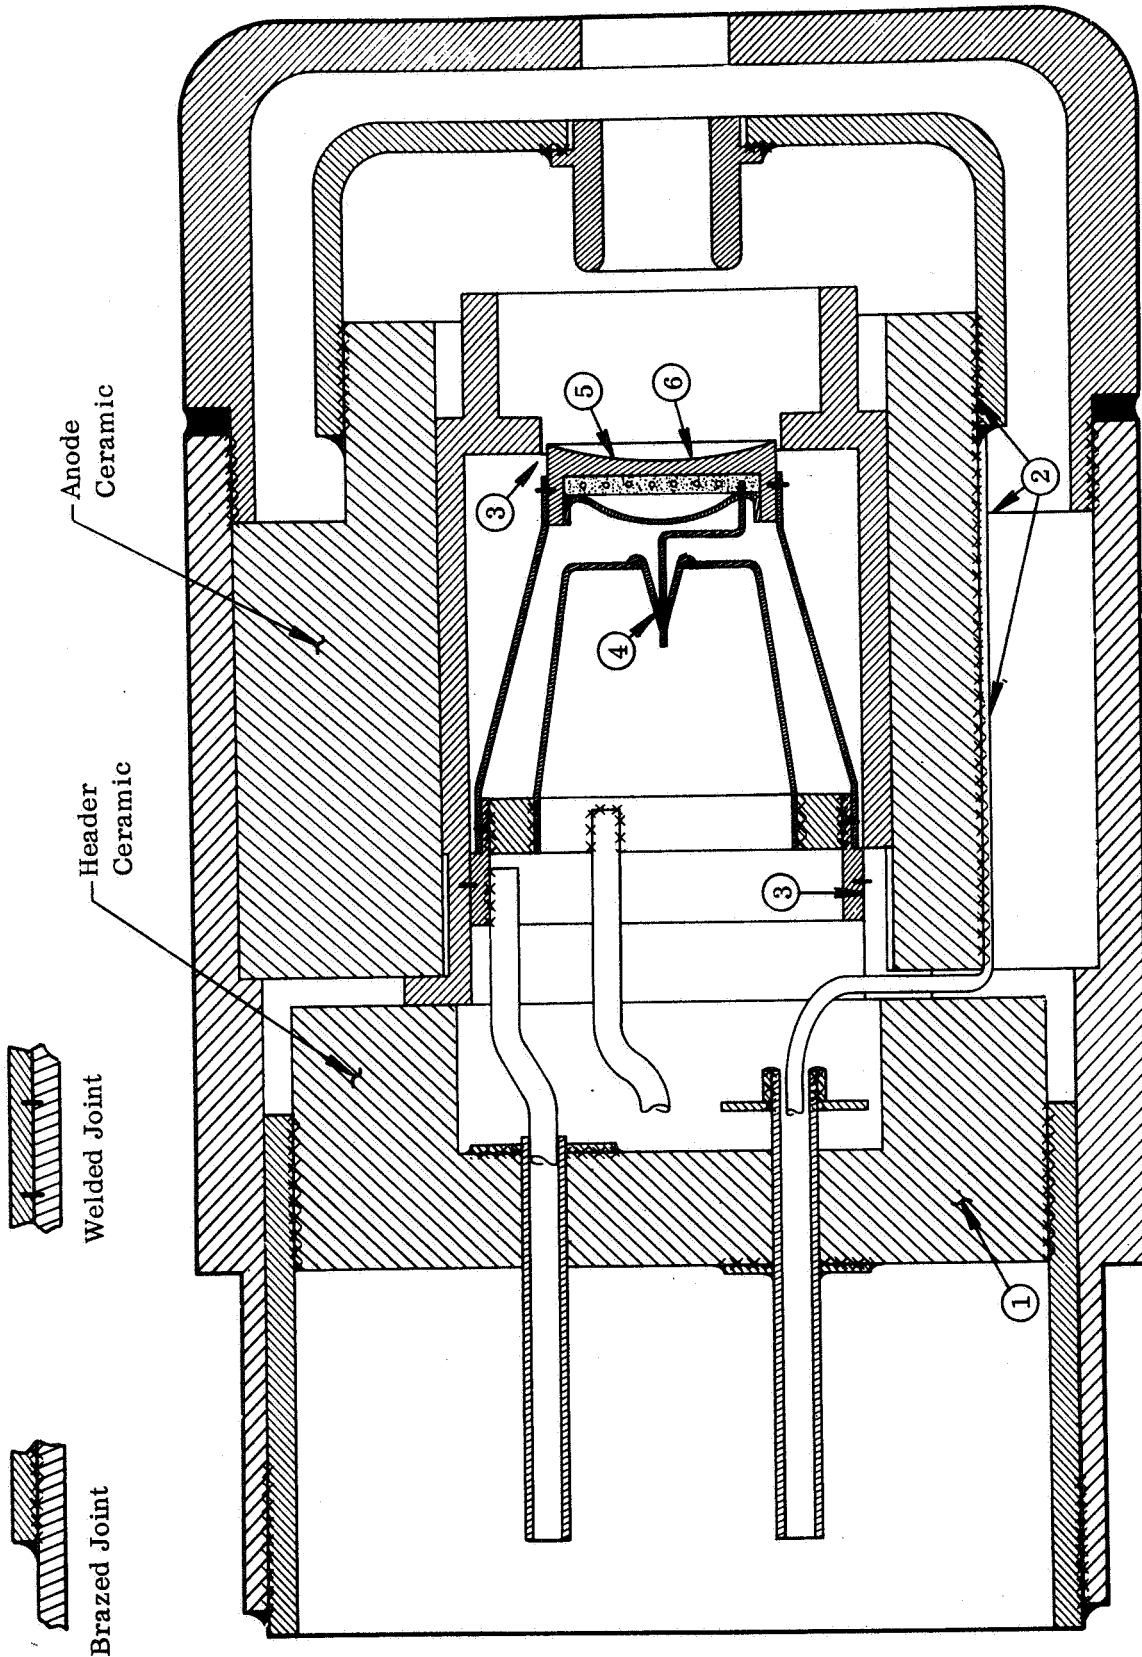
Physical configuration of Electron Gun Design No. 1. Labels refer to damaged areas after high impact tests, as follows: 1. Cracked ceramic causing vacuum leak, 2. Broken anode ceramic and displaced anode, 3. Displaced cathode assembly, 4. Heater lead circuit broken, 5. Loss of cathode coating, 6. Change in cathode radius of curvature.
